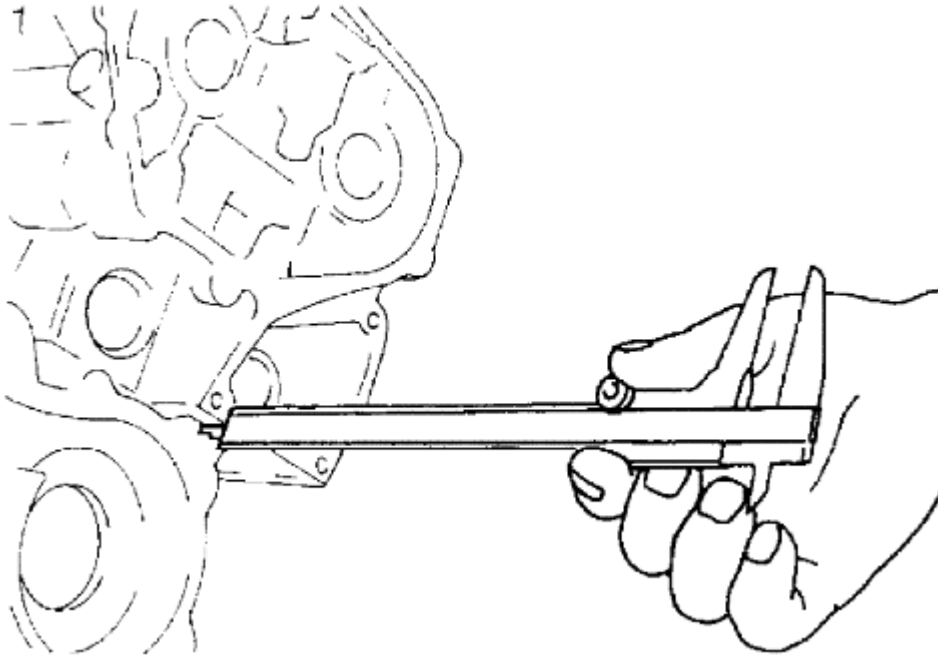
Measuring Distance Between Front End Faces Of Cylinder Block And Cylinder Head
